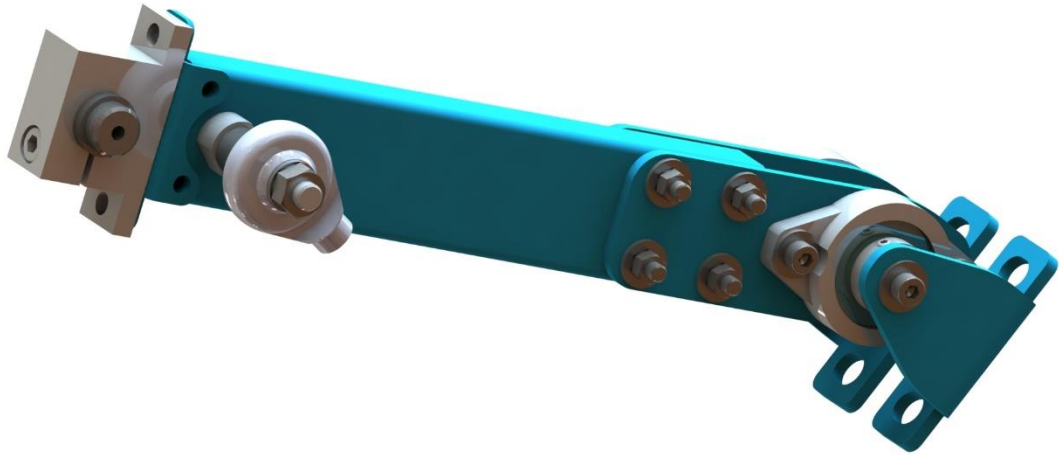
Lower crankshaft of “3-Joint” mechanism.
